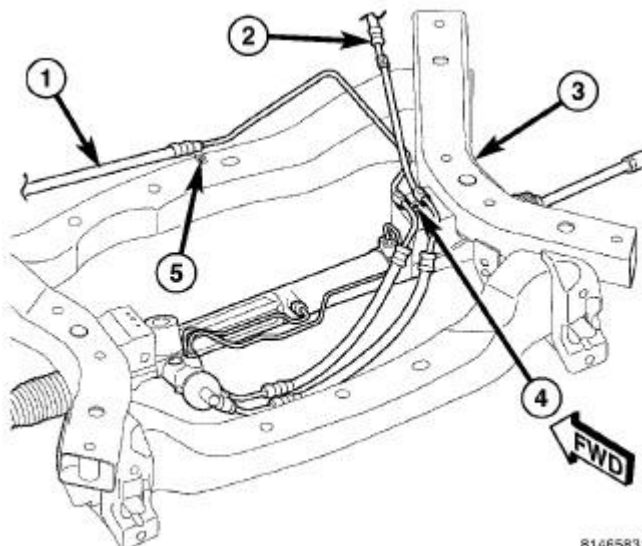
HOSE ROUTING ALONG ENGINE CRADLE
